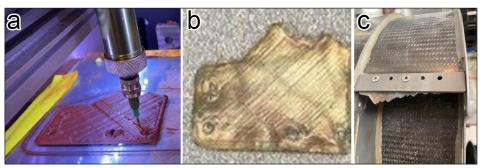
Printing a replacement part for a lunar excavator using direct ink write. a) Printing the polymer 'green body'. b) The metal part after sintering and reducing the green body. c) The printed and reduced part attached to the excavator.
